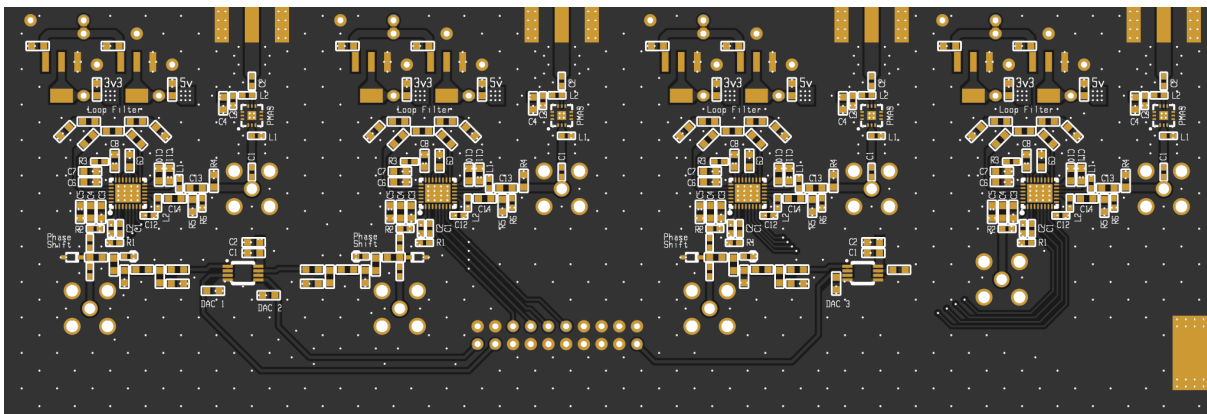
DLL-HPC transmitted signal beamformer PCB front-side render
